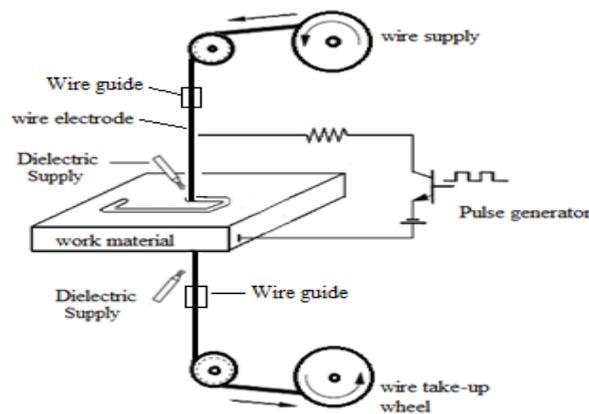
Wire Electrical Discharge Machining (WEDM) process [12]
